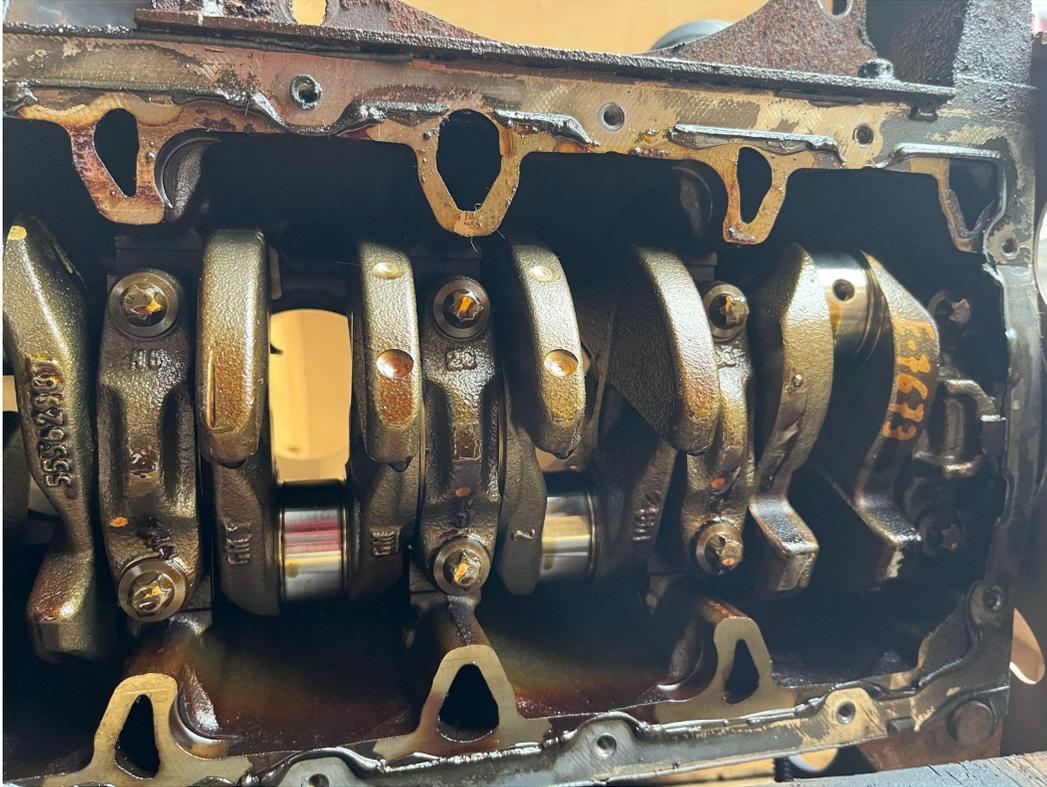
This photo shows the underside of an engine block, with the crankshaft exposed. The machined down segments are where the connecting rods bolt on, and bearings hold the shaft in place between them.
